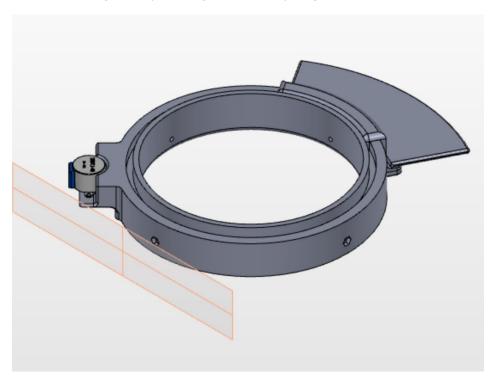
CAD Design of the Self-Adjusting Helmet (Isometric View)
